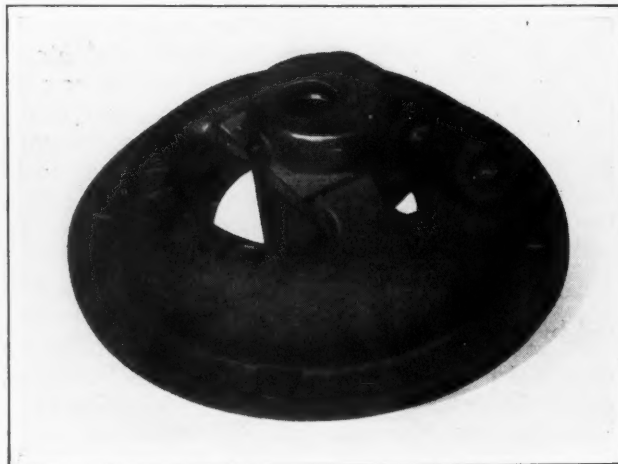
Cast-iron Motor End Bracket Replaced by the Welded-steel Bracket Shown in Fig. 2
